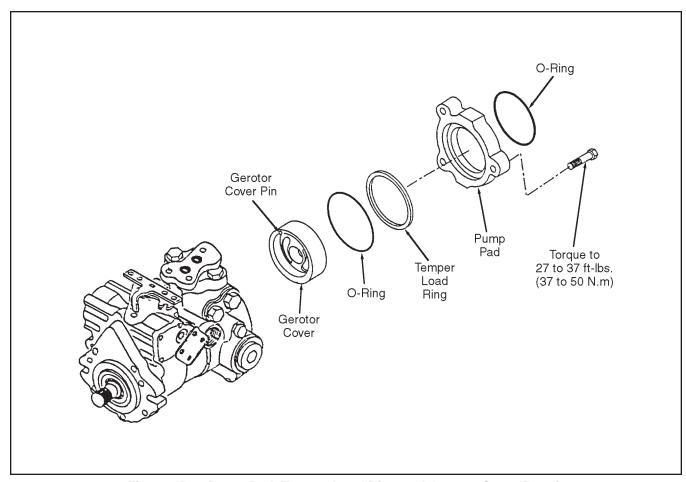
D-3. Pump Pad, Temper Load Ring and Gerotor Cover Repair
